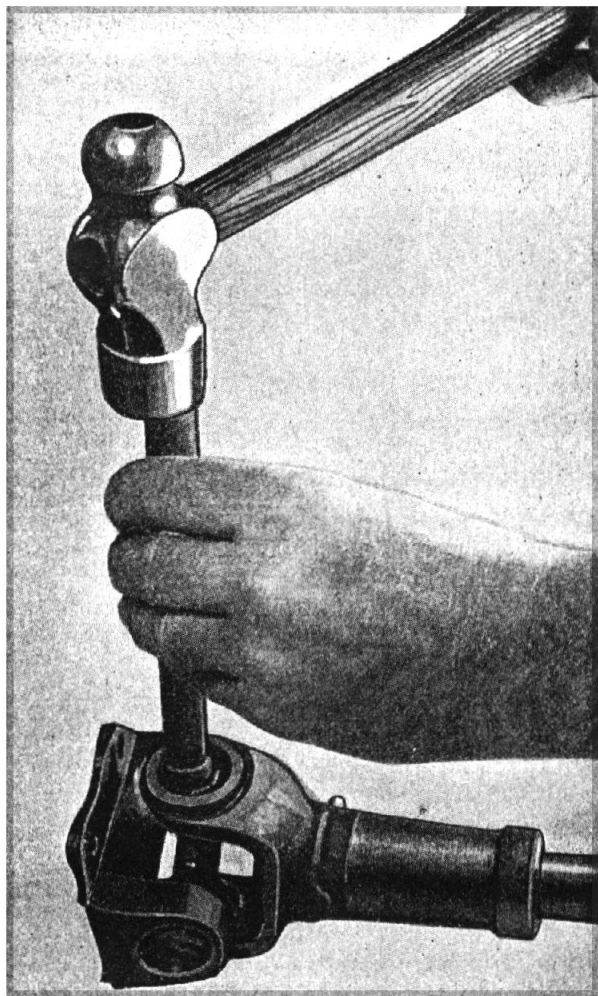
REMOVING UNIVERSAL JOINT BEARING
